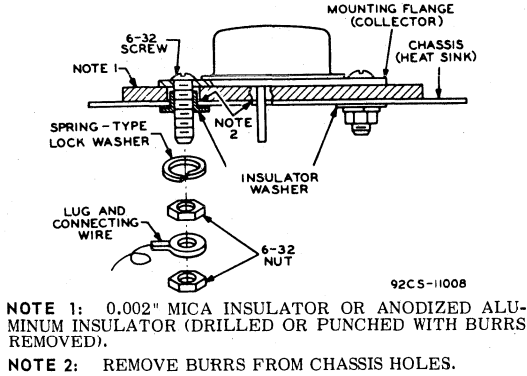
Suggested Mounting Arrangement for RCA-40421.
